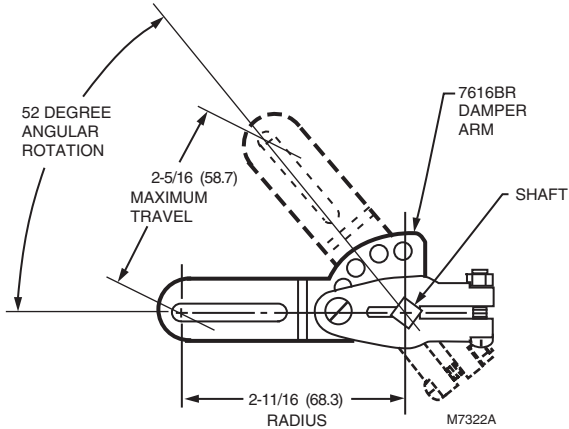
7616BR Damper Crank Arm can be attached to actuator shaft to drive a damper when valve is open.
